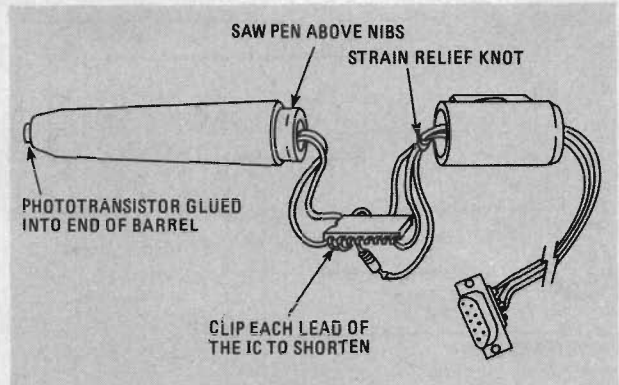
ASSEMBLY OF COMPONENTS. Note that the points on the IC are wired point-to-point with short lengths of wire.
